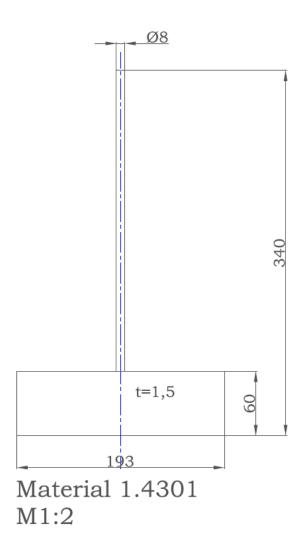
Dimensioned drawing of blade stirrer for coarse screening
